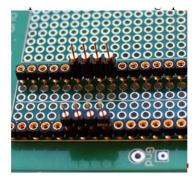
4-Pin Length Terminal Strips Inserted in DIP Socket
